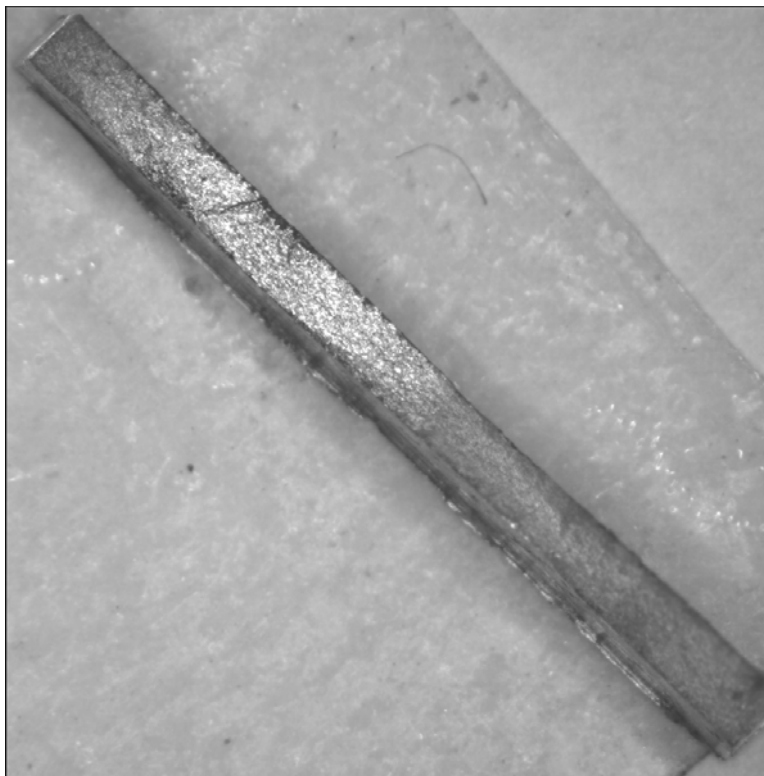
Fracture Surface of Specimen 6002.
